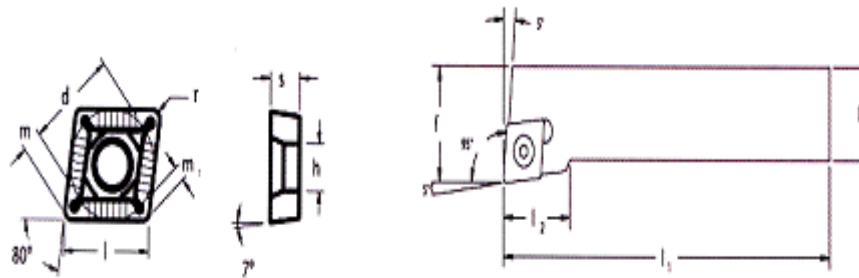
Forms and Dimensions of the Carbide Insert and Tool Holder
